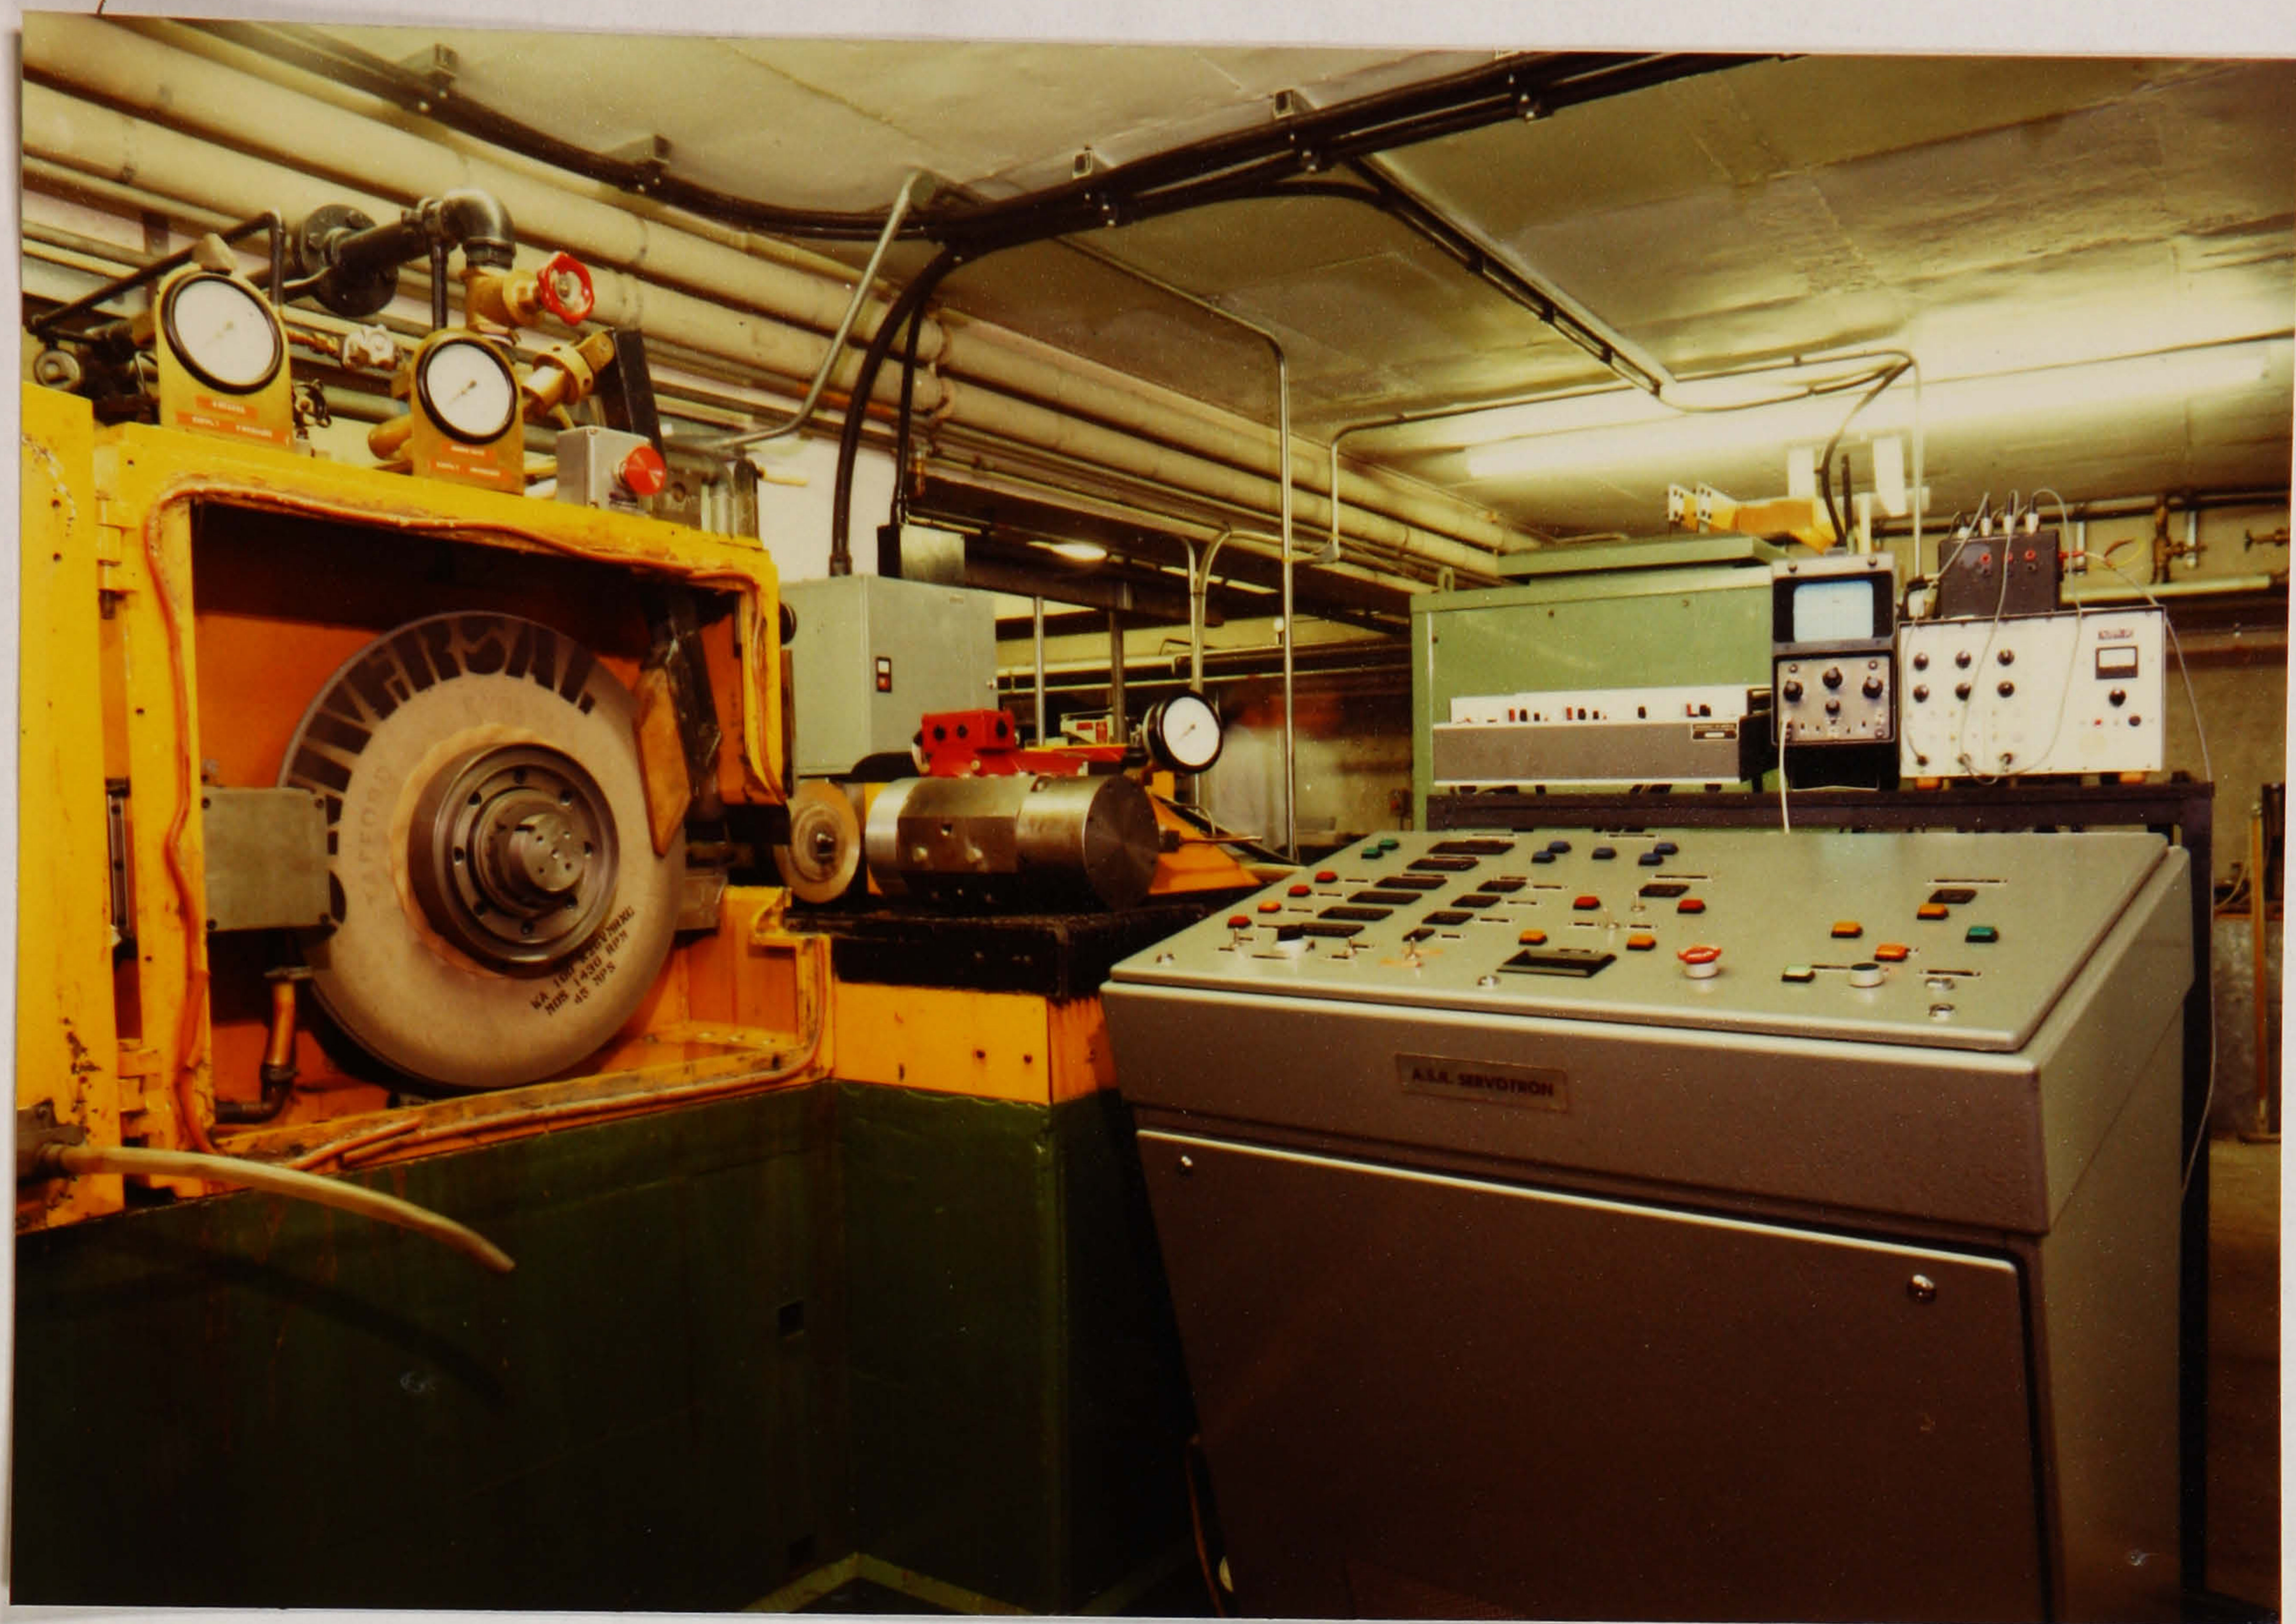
GENERAL VIEW OF THE CREEP-FEED CYLINDRICAL GRINDING MACHINE
